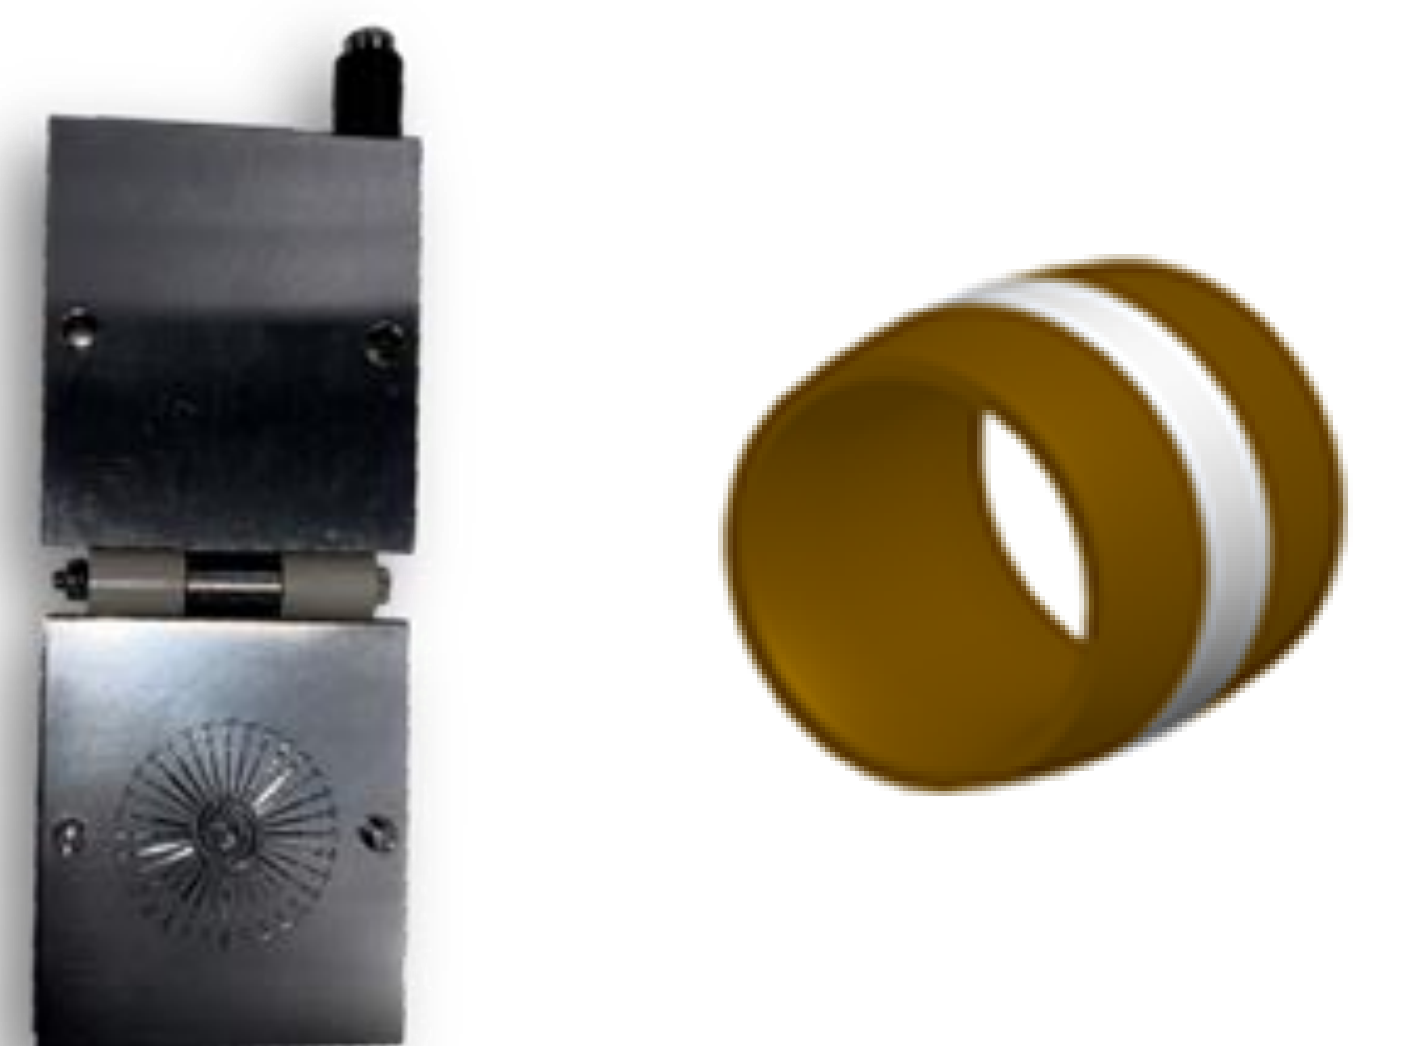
32 Cavity Mold Tool (Left) and Electrode Ring MCRD (Right)
